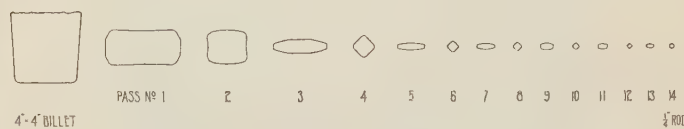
ROD MILL REDUCTIONS—4-IN. X 4-IN. BILLET TO 1/4-IN. ROD
